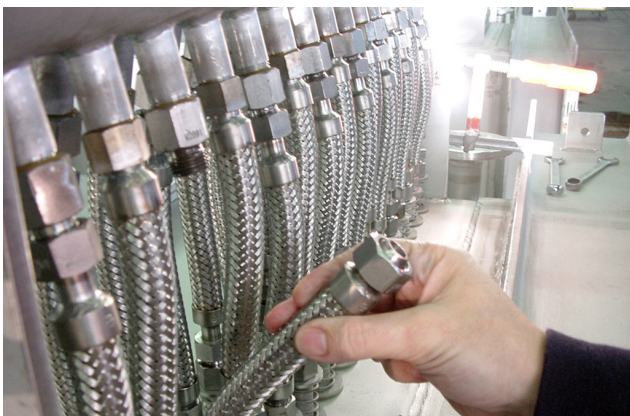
Operators should regularly inspect hoses to avoid leaking on threaded connections, corrosion and, ultimately, failure.
